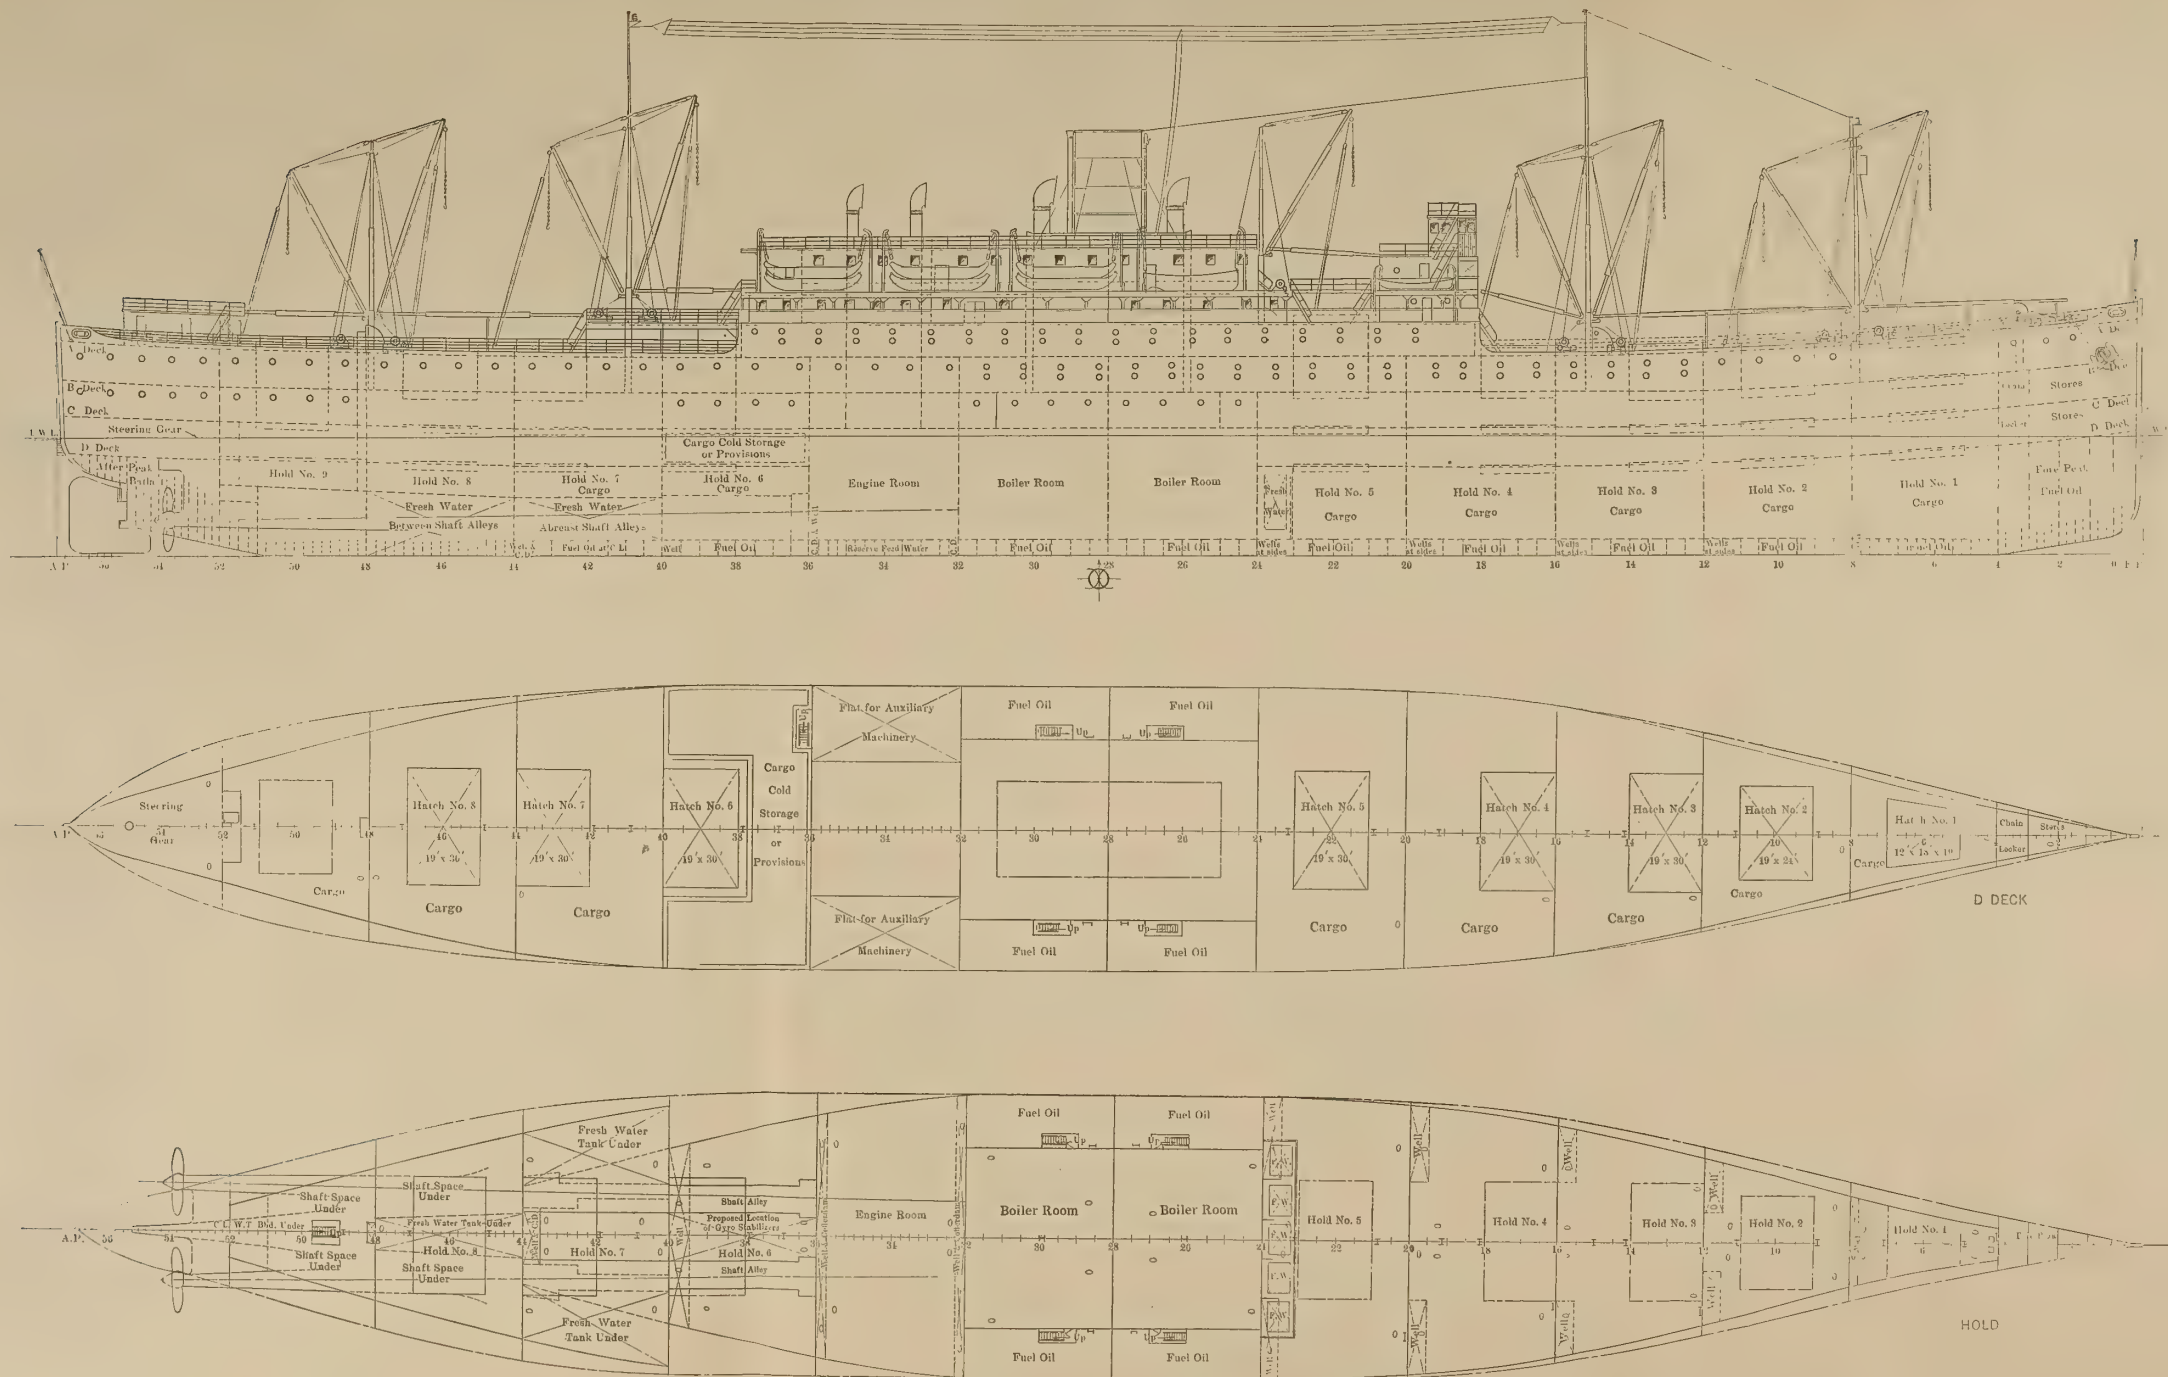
Profile and Lower Deck Plans of 535-Foot, 17½-Knot Ship
